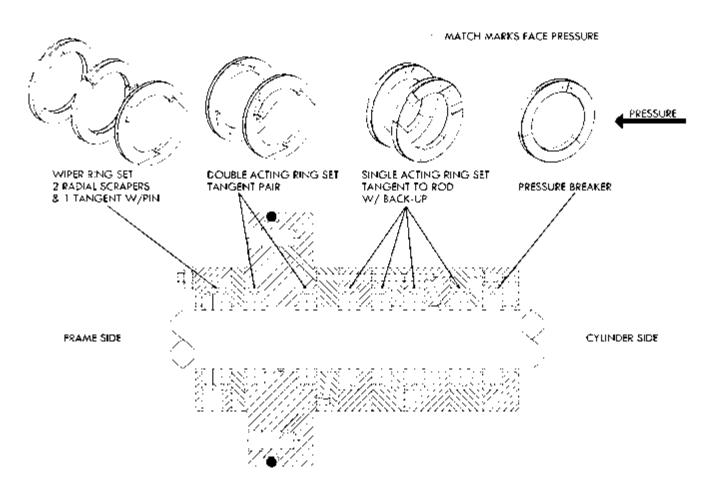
Piston Rod Pressure Packing Exploded Views
